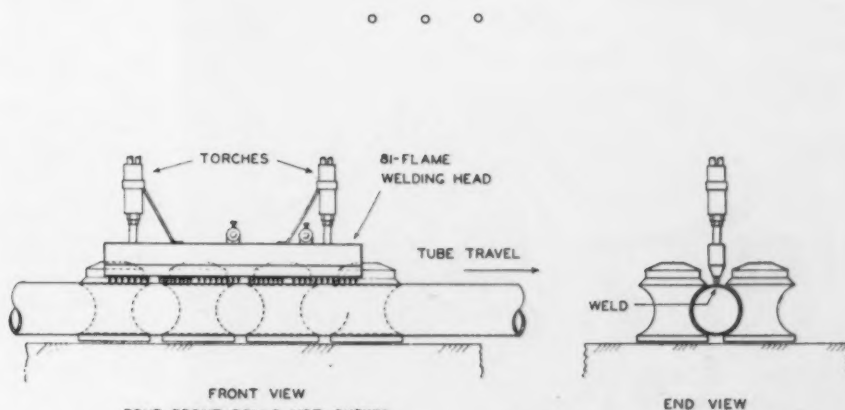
Drawing showing relative positions of welding head, tube and welding rolls.
